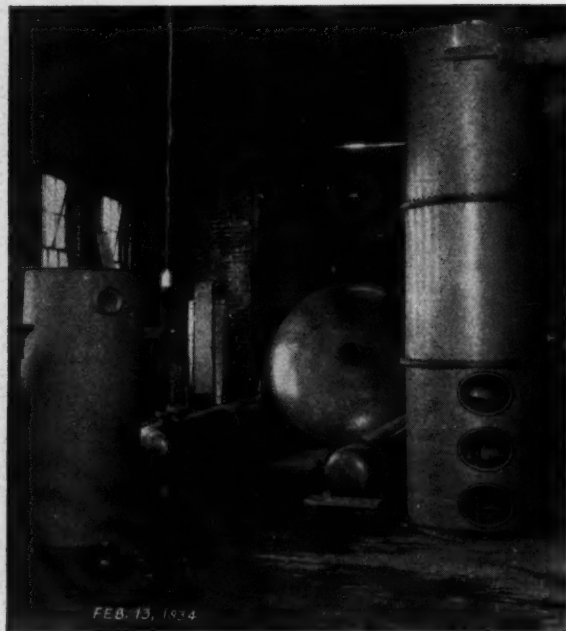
By using arc welding in the construction of this copper distillery equipment, many hours were saved.
